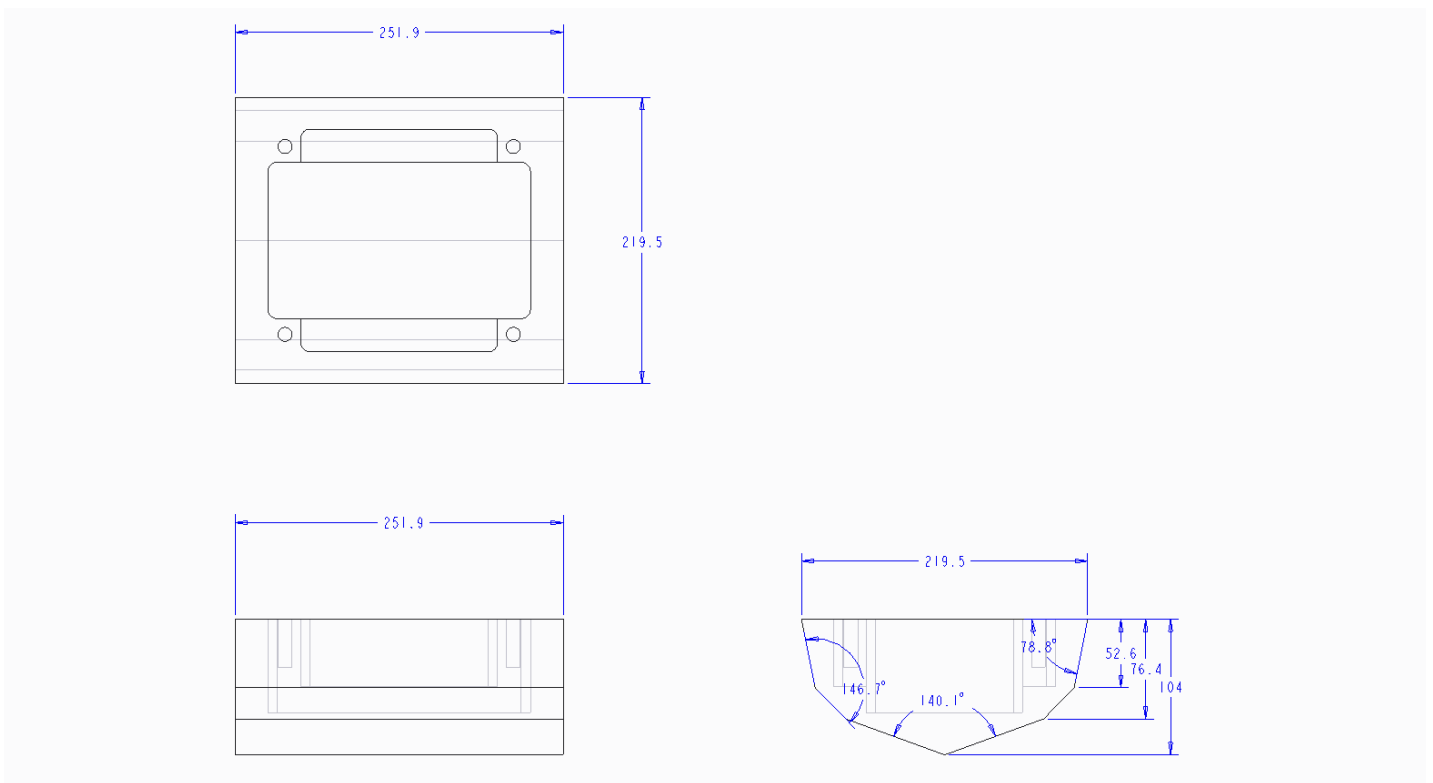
Dimensioned CAD sketch of V-bottom hull (dimensions in millimeters)
